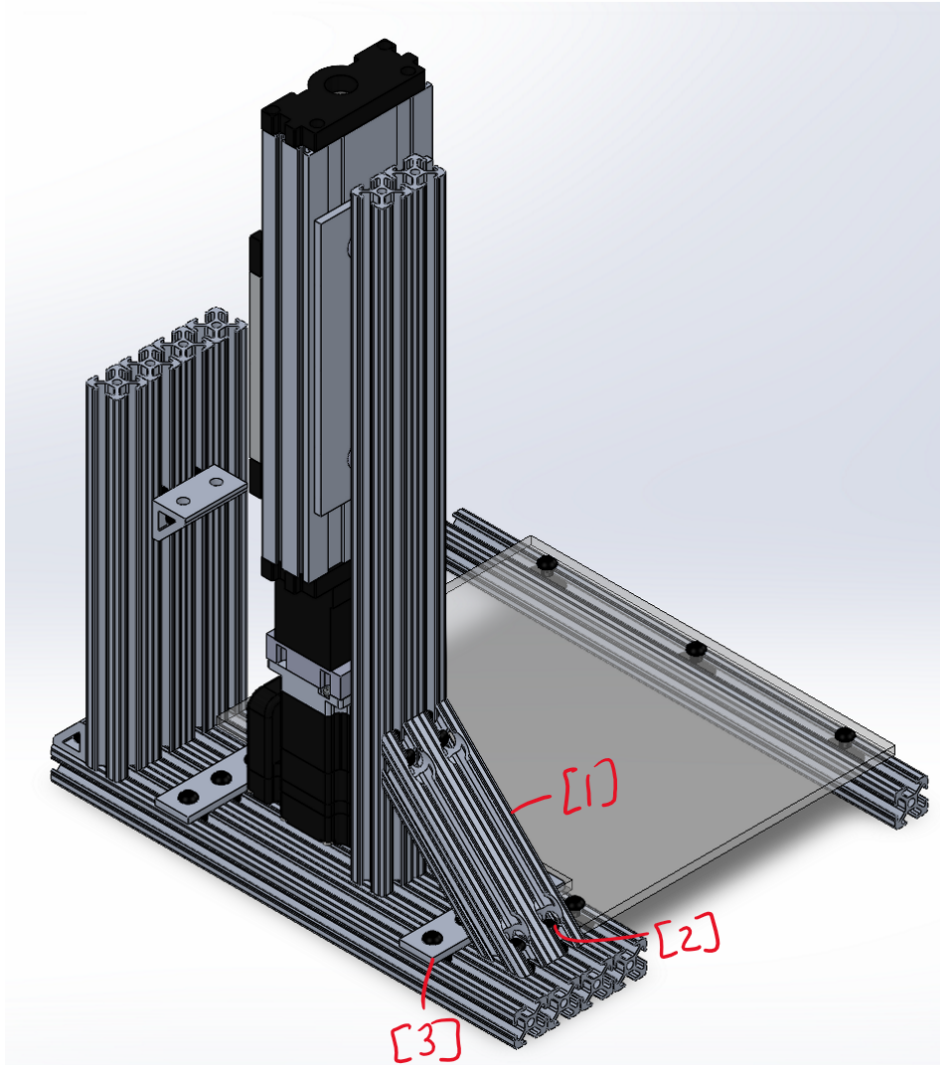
Ball Screw to Base Assembly of Physical Prototype.
